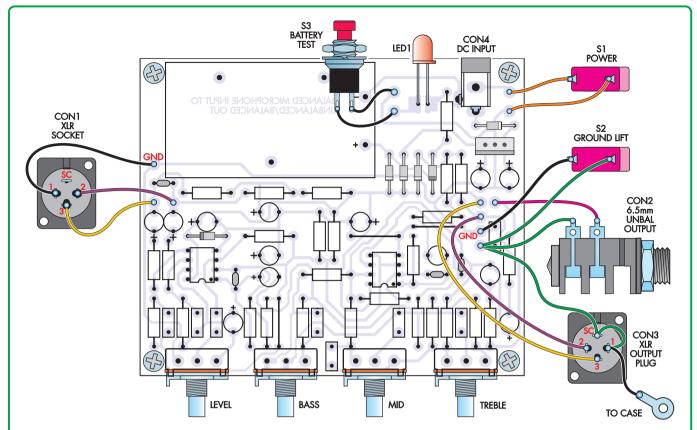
follow this wiring diagram to connect the external switches and sockets to the stakes on the PC board. Note that CON1 (balanced input) is a 3-pin female XLR socket, while CON3 (balanced output) is a 3-pin male XLR socket. The jack socket (CON2) provides the unbalanced signal output
